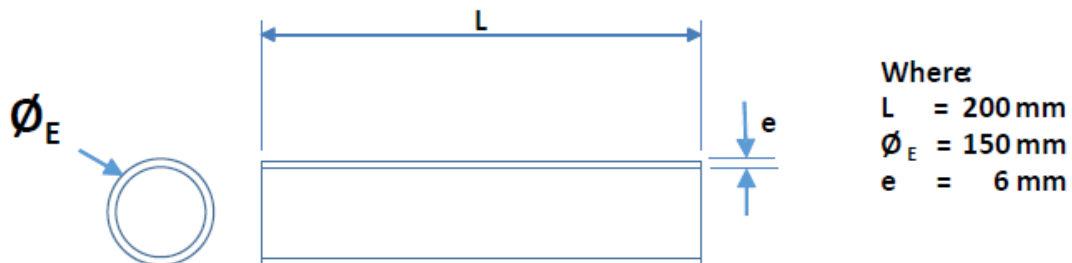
Dimensional sketch with nominal dimensions of the pipelines analysed
